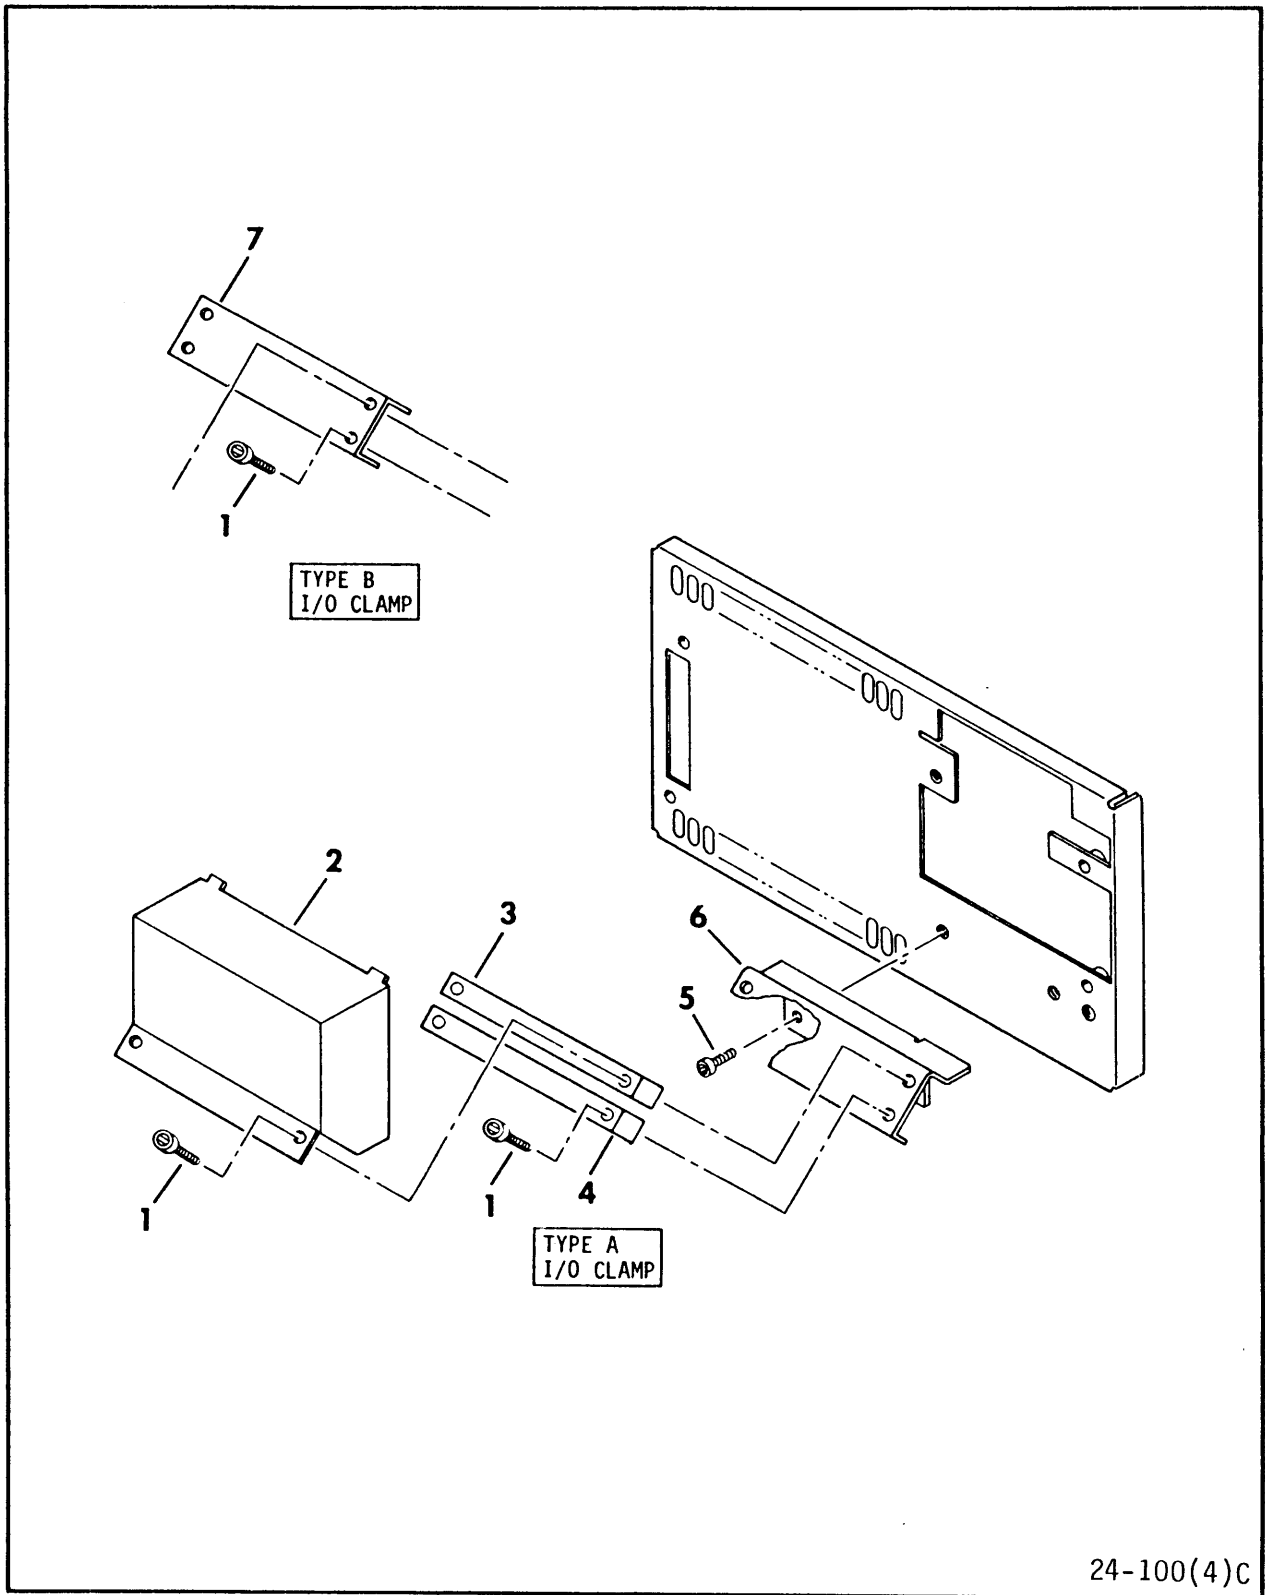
Eight-Inch Module Drive (Sheet 4)
